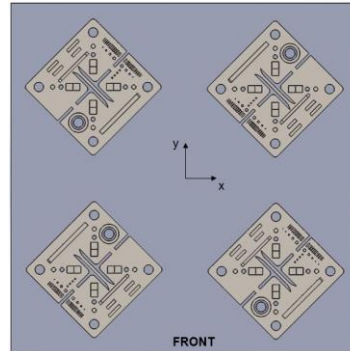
Top view drawing of the M290 test artifact build layout, with the x-axis denoting the direction of the recoating blade.
